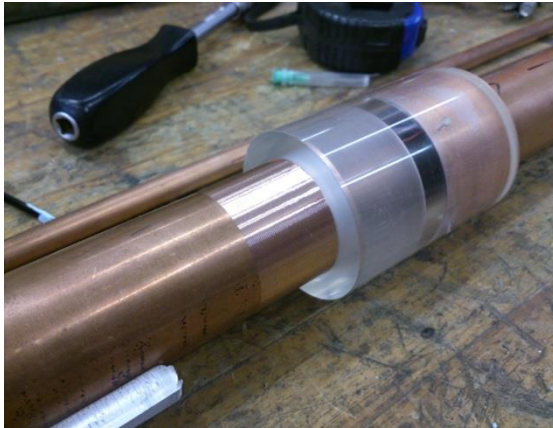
Acrylic glass fitting machined to fit the outer tubes.
